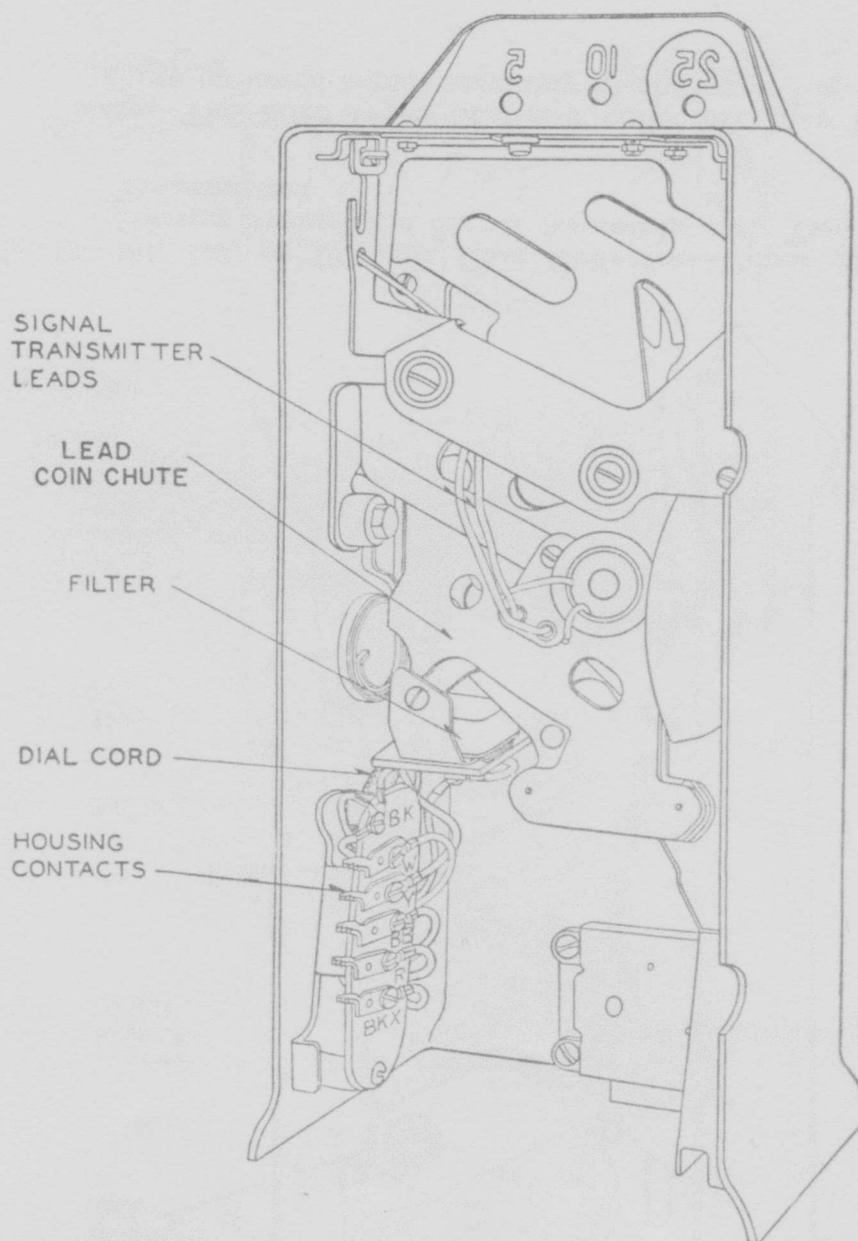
181, 182, or 183-type Coin Collector—Upper Housing Having Swing-type Signal Assembly with One Signal Transmitter
